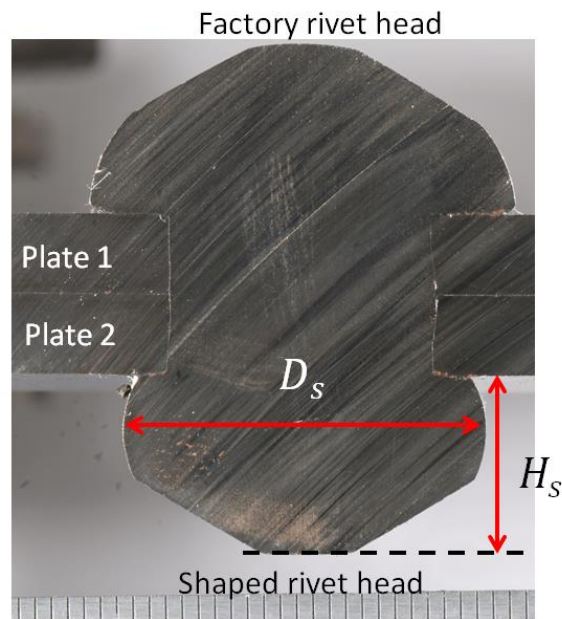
Cross section of riveted joint showing the shaped rivet head measurements.
